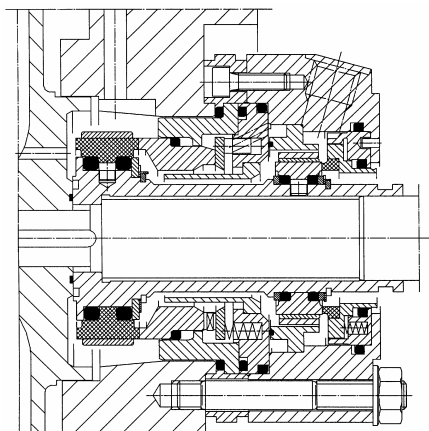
Double mechanical seal with a stationary spring and pumping screw
